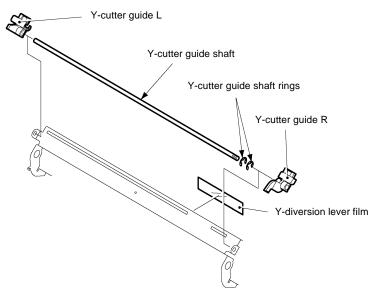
Disassembling the Y-diversion Lever Assy
